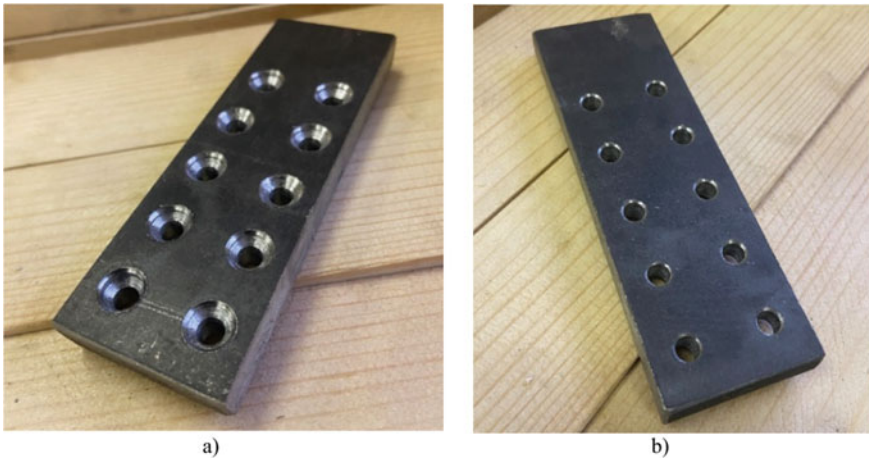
a Manufactured metal plate; b Manufactured metal plate. View from the back
